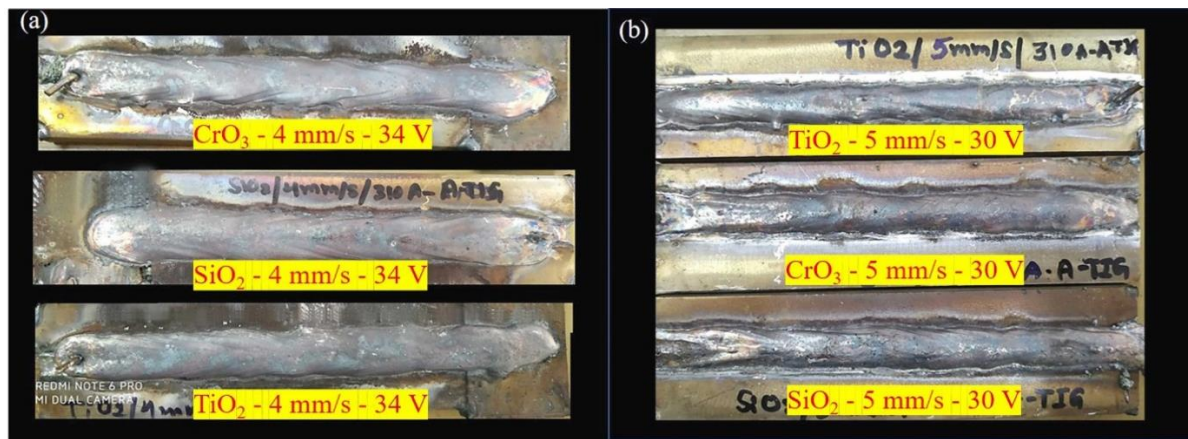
Welded coupons of hybrid arc welding (HAW) welded at two different voltages (i.e., 34 V and 30 V) and with two different welding speeds (i.e., 4 mm/s and 5 mm/s)
